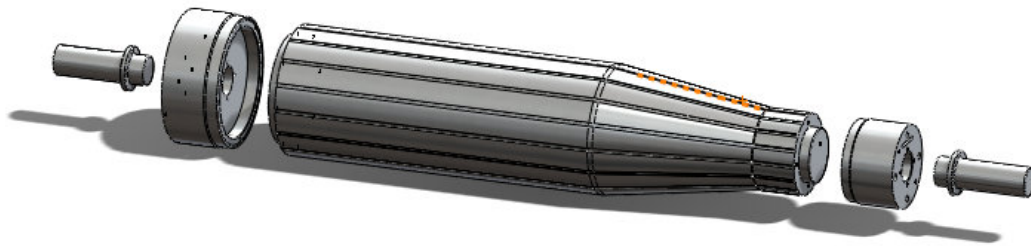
Exploded view of the fully assembled mandrel, all parts are bolted together with M10 cap screws
